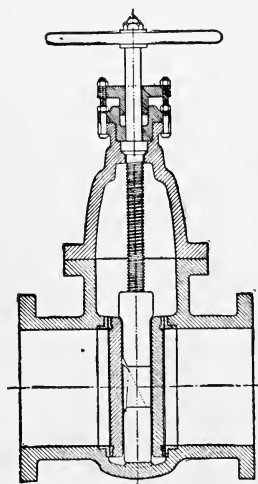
A Typical Gate Valve, Split-wedge, Bolt-top, Inside Screw.
